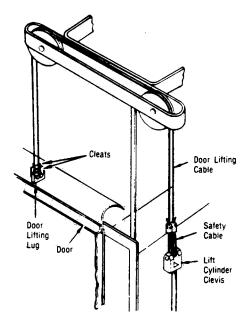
ROUTING DOOR LIFTING CABLE.
